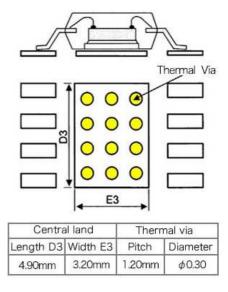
Example of thermal via dimensions and placement for back-sided heat dissipation package
